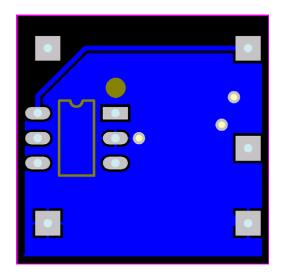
Bottom, TDFN4 1.2 mm x 1.6 mm PCB Layout
